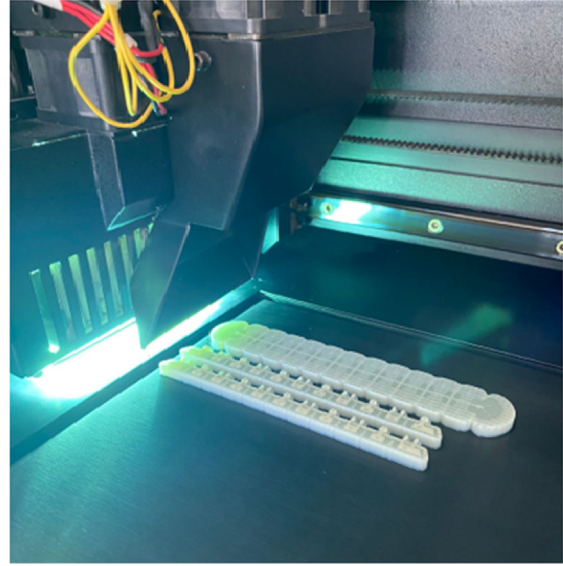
Picture of the prototype during printing in the Stratasys J750 machine.
